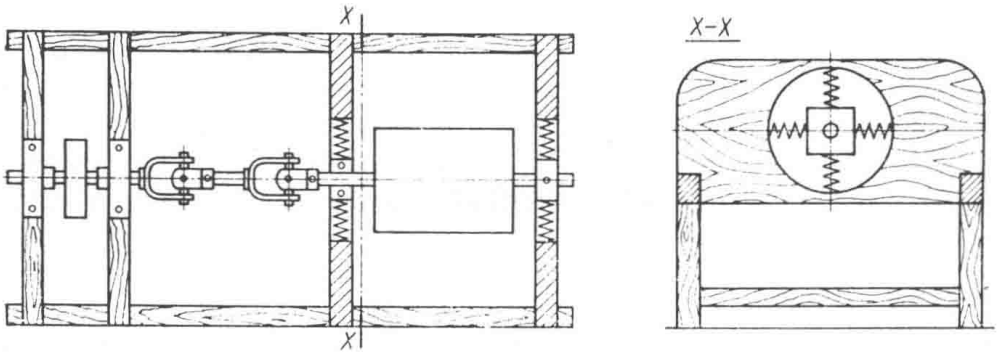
The first balancing machine built by Martinson in 1870 [LAC 79]
